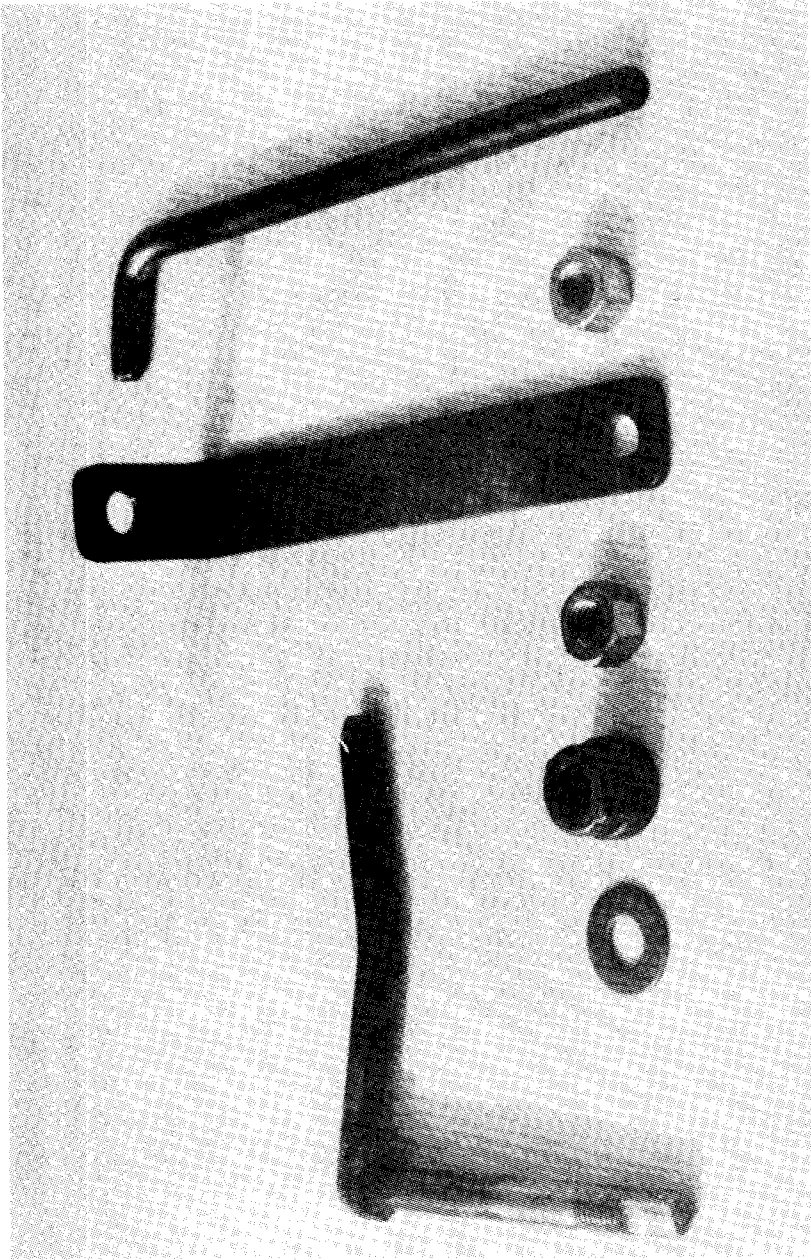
Parts for the shaker assembly. Note the flattened portion of the bolt (at extreme left) which positively locks into the handle (third from right). At the extreme right is a "poker bar" which engages into the hole in the top of the handle to operate the shaker mechanism; the shaker handle will get very hot during normal gasifier operation.
